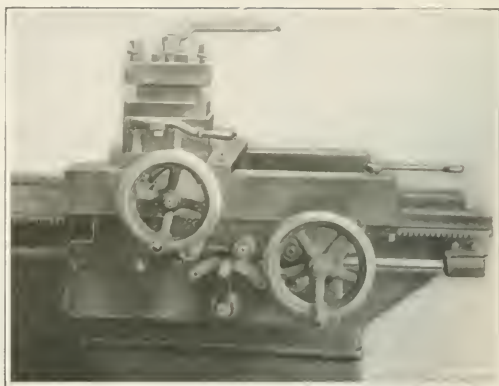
Close View of Apron, showing Arrangement of Feed Reverse Lever
